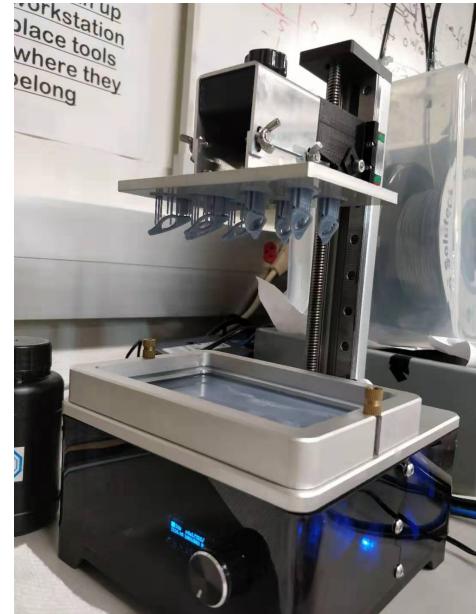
3D Printed Body structure using SLA 3D printing technology
